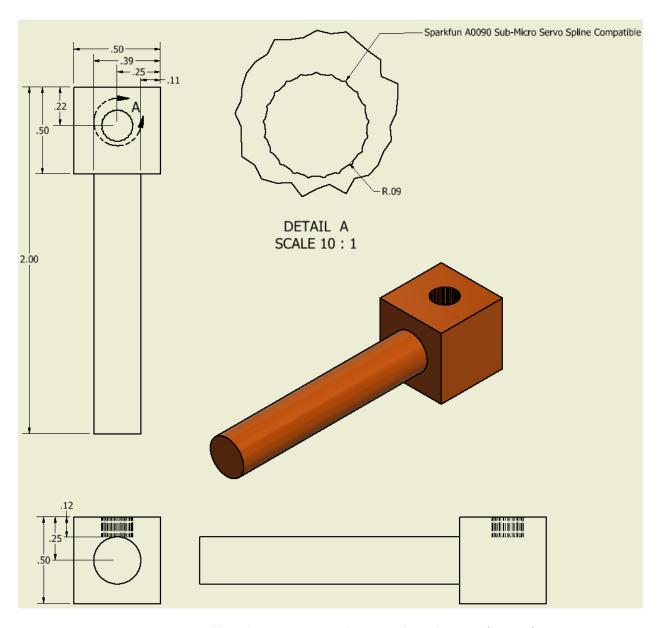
Pen Holder Sub-Micro Servo Attachment Mechanical Drawing (Units: in)
